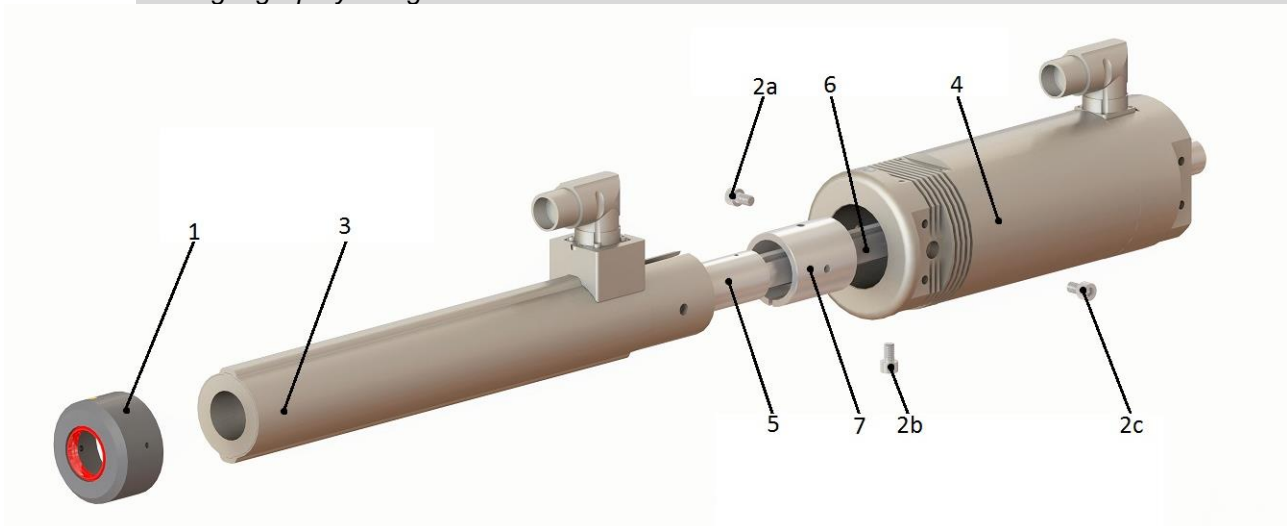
Disassembling/Assembling a Linear Rotary motor
